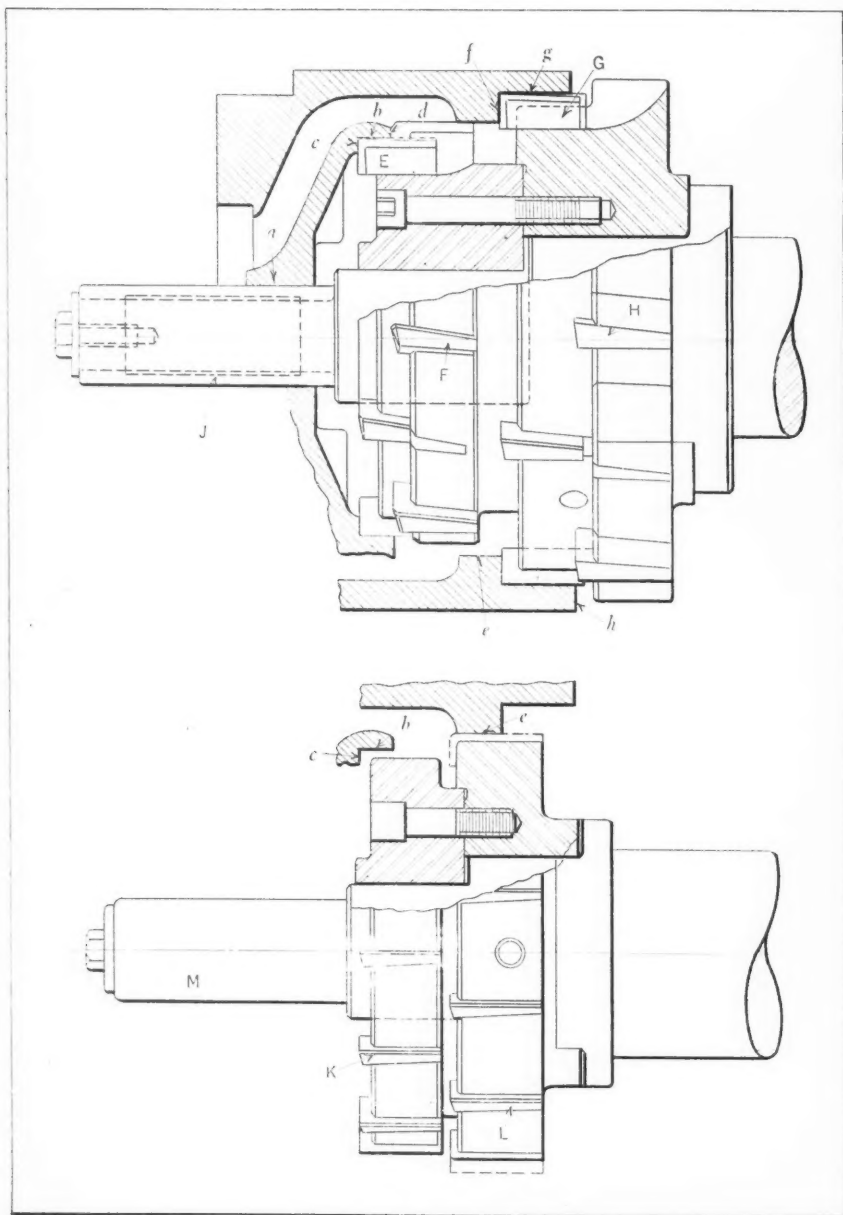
Multiple Tool Assemblies Used for Finishing the Larger Internal Surfaces of the Pump Bowl Shown in Fig. 1, Concentric with Hole a
